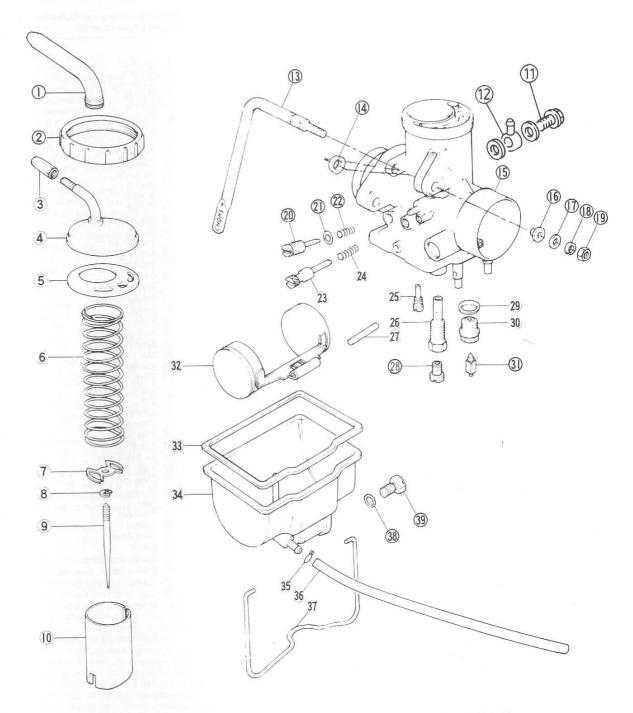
Carburetor - KLT200 A1, A2 and A3 - up to frame no. 522924 (Sec 8)
